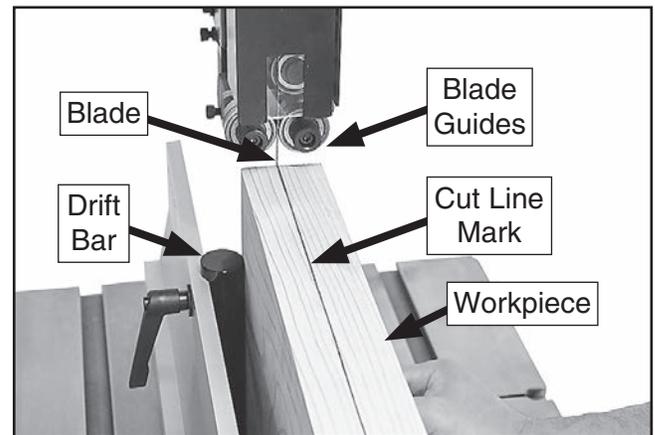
Workpiece positioned to cut using resaw fence with drift bar.
